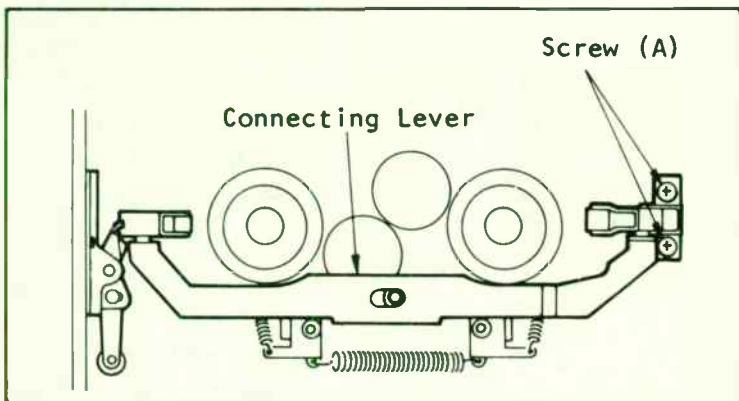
Brake torque adjustment (courtesy of Magnavox).
